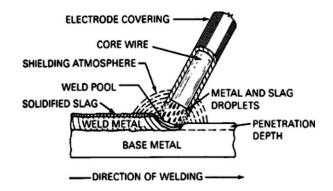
Schematic set-up for shielded metal arc welding process
